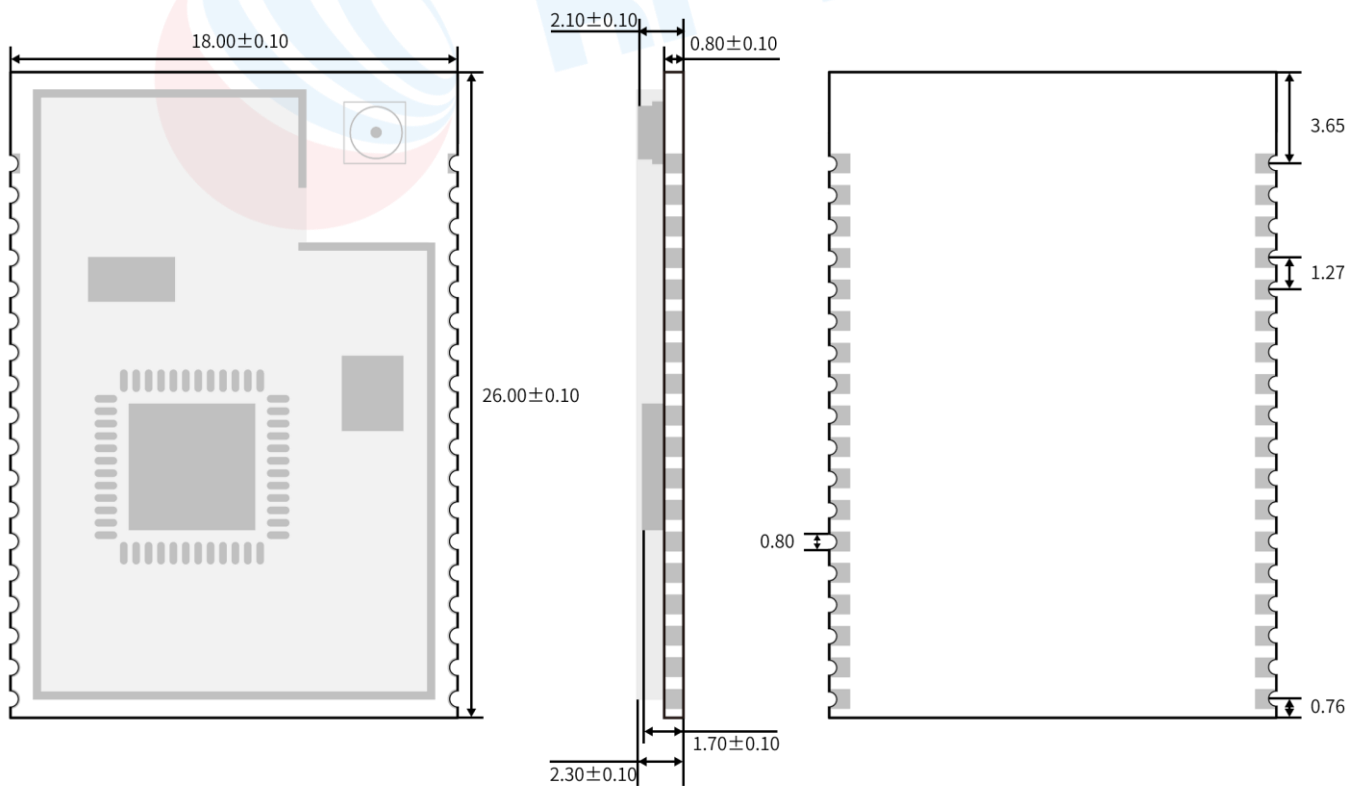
Recommended PCB Footprint of RF-SM-1277B1/B2 (mm)
